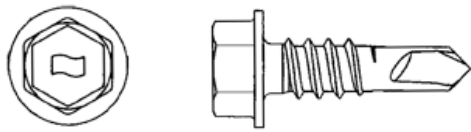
#12-14 INDENTED HEX WASHER HEAD TYPE 3 SCREW
